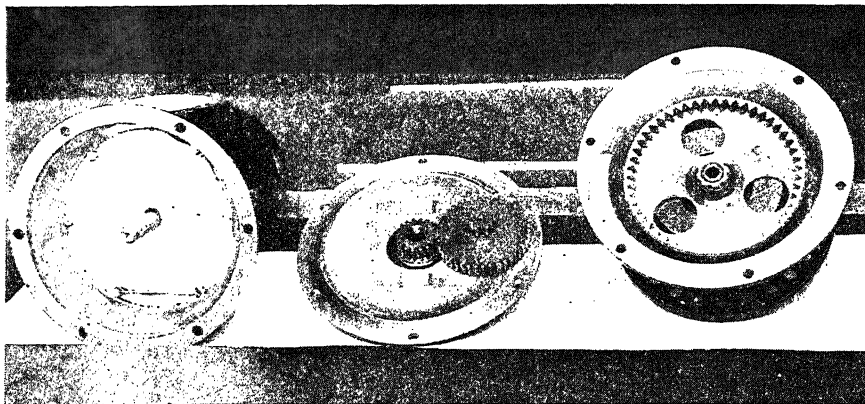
SUB-ASSEMBLY OF ROTAX ECLIPSE E160 STARTER
